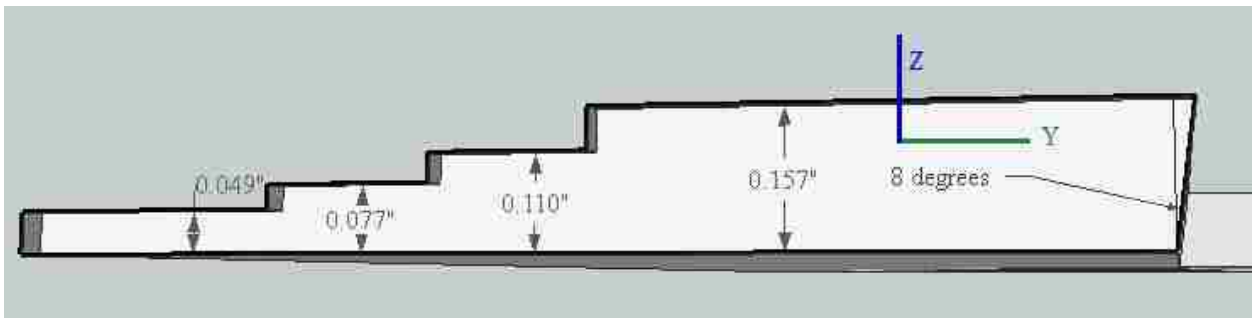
Cross sectional view of the 20x20 cm² upper trimmer lead plate in the in-plane dimension illustrating the thickness values of the plate.
